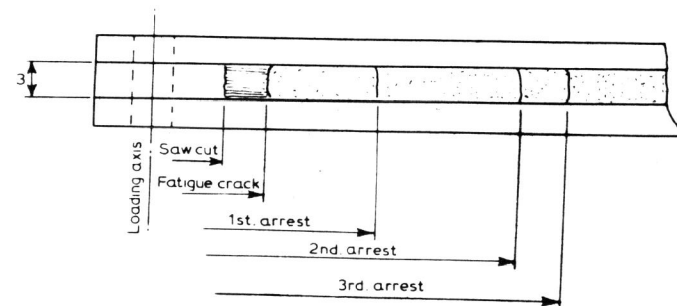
(a). Fracture appearance of DCB specimen, steel UXW, schematic.
